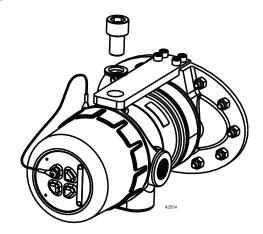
Attach Detector to Flange Mount Assembly Using Bolt and Washer Provided
